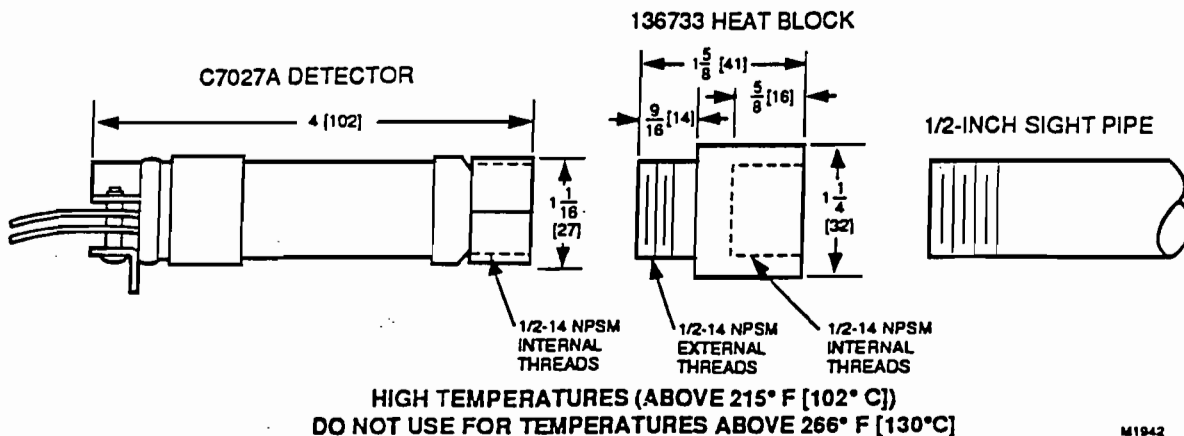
Mounting dimensions of 136733 heat block, in in. [mm in brackets].
